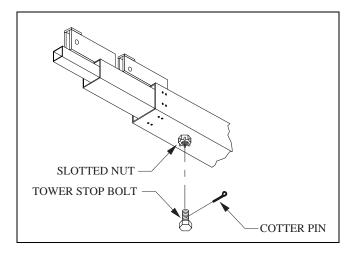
Adjusting the tower stop bolt ensures safe operation of the tower
